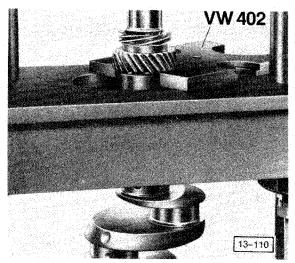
Distributor drive gear/crankshaft timing gear, removing
